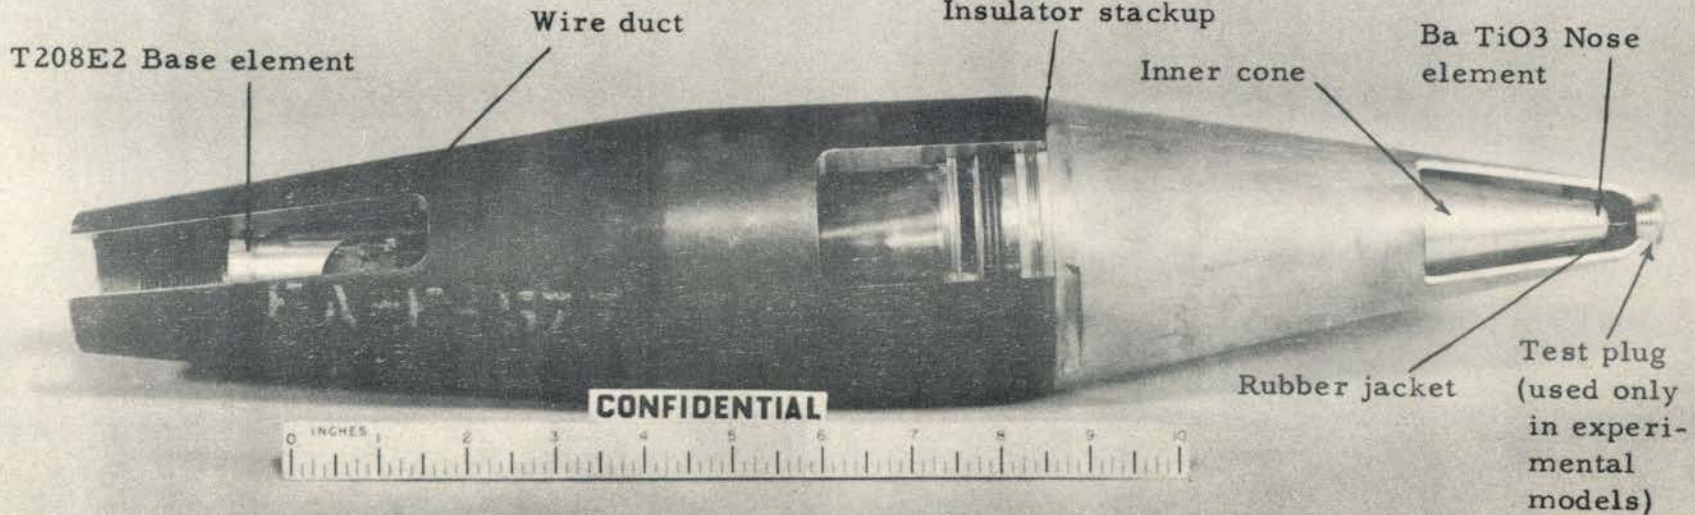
T208E2 PIBD fuze assembly in 90mm, 108E16 shell cutaway to show mounting details
